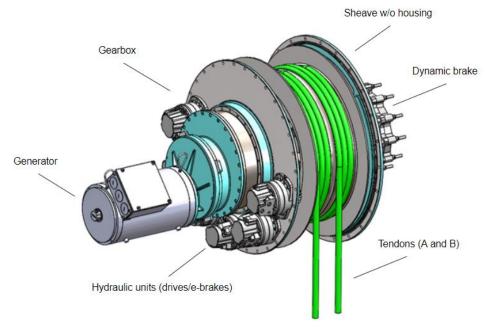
Complete drivetrain assembly with sheave housing removed to show tendon wrap
